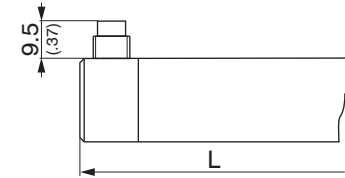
Displacement sensor type - SA with axial plug connection
